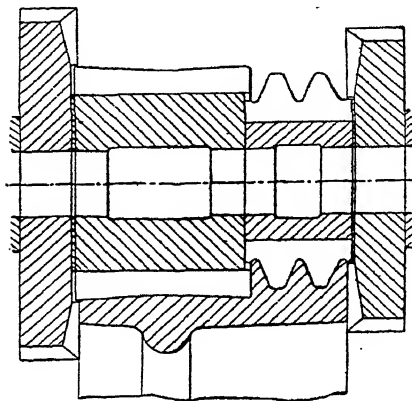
Showing how a complicated profile can be milled faster than it can be turned.
